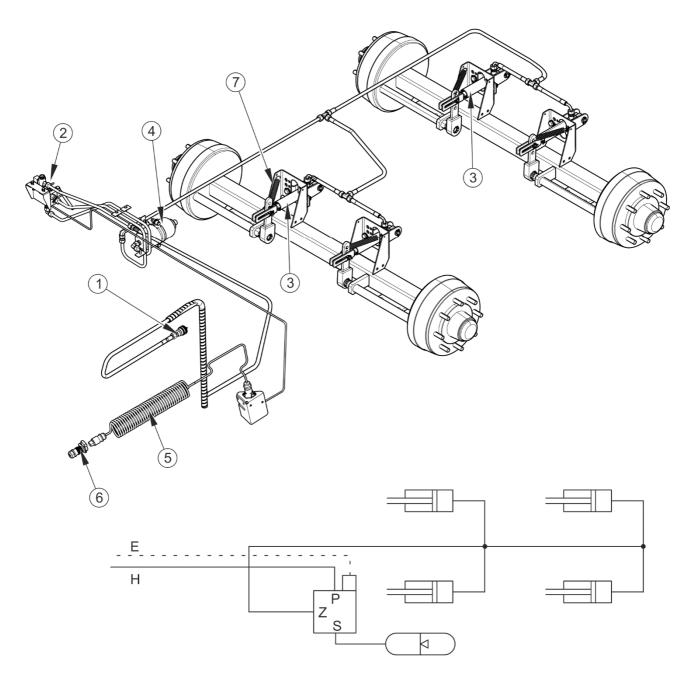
Design and diagram of hydraulic braking system with braking force regulator
